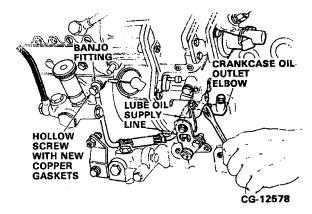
Install Lube Oil Supply Line (1987 Model Year Shown)
